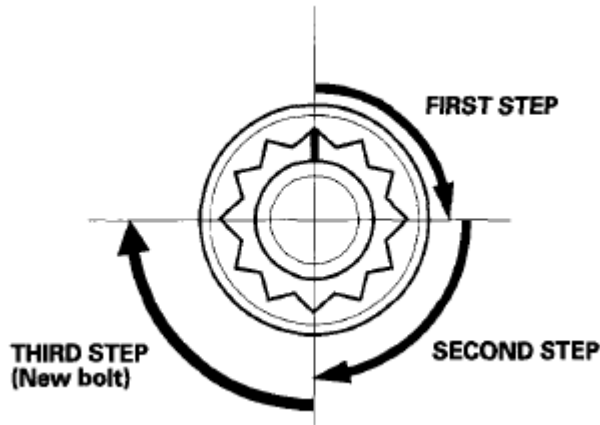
Identifying Cylinder Head Bolts Tightening Steps
